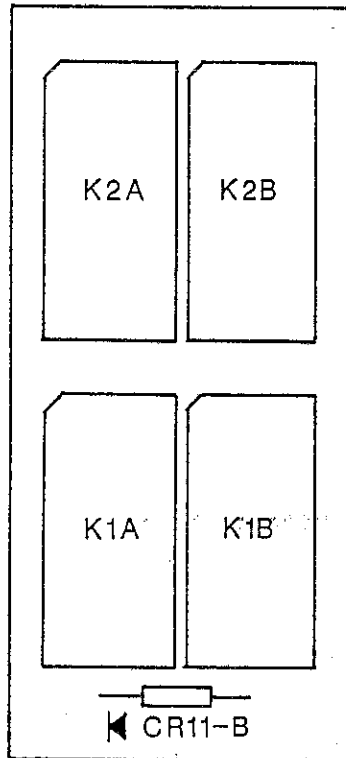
Relay Adapter Assembly A1. Parts Location Diagram
